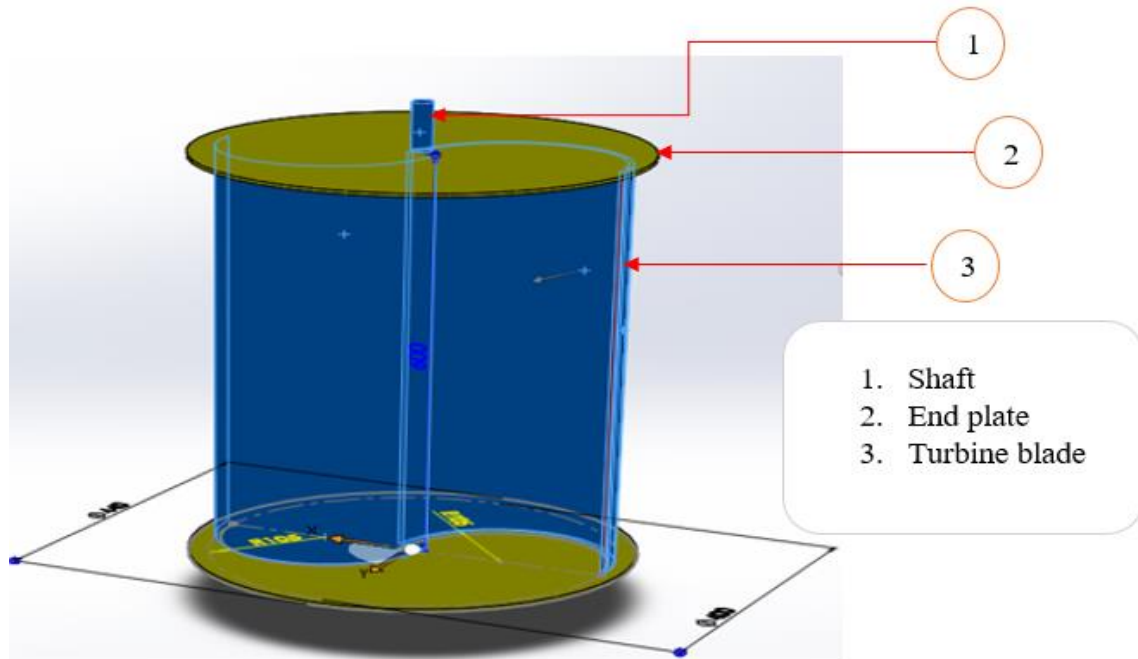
7: 3D-model of designed Savonius rotor as per specified parameters
